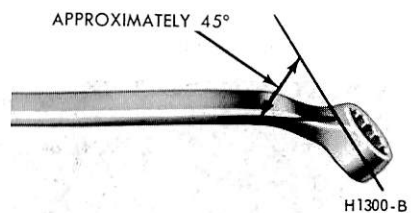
Wrench For Bleeding Brake Hydraulic System
